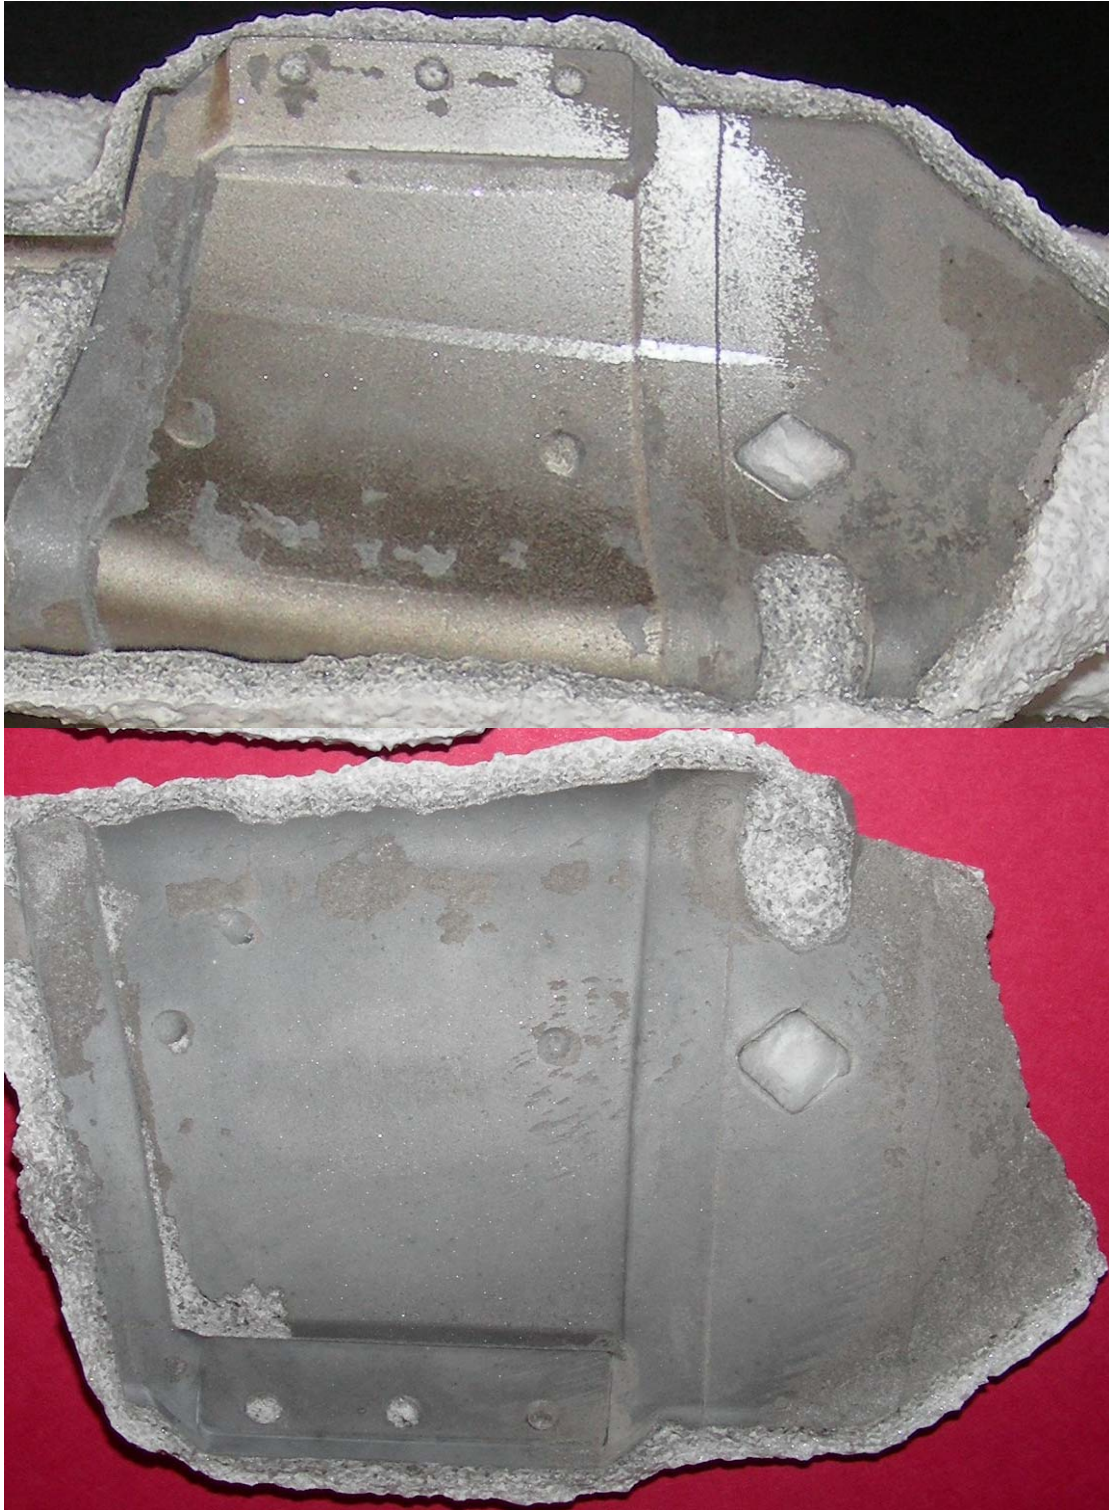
CMSX-4 SX casting with metal mold reaction and secondary grain defect
